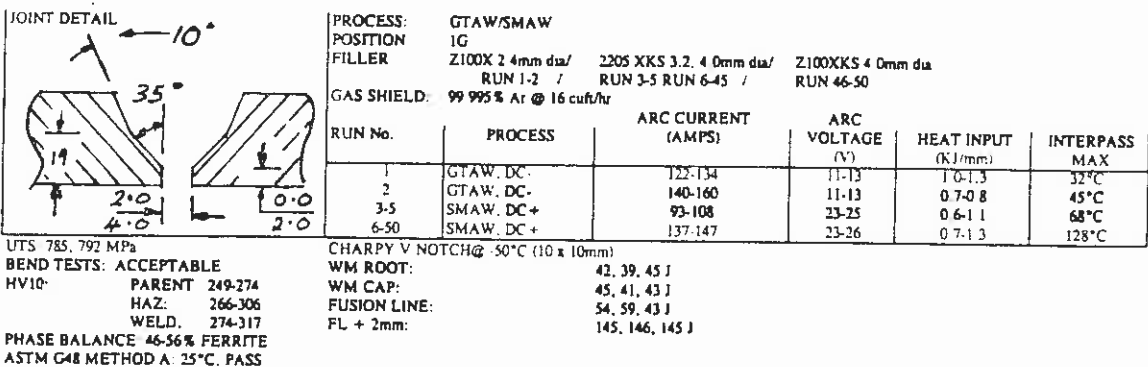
Details and Properties of HIP Zeron 100 UNS S32760 Welded Joint in 12" NB x 62.0mm Thick Manifold PQR
